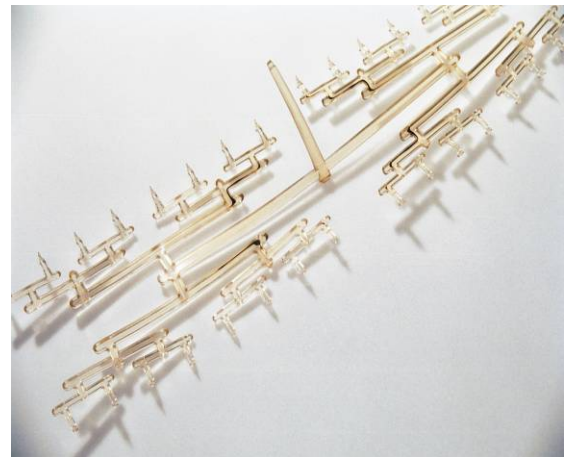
Illustration of a 32 cavity geometrically balanced mold
